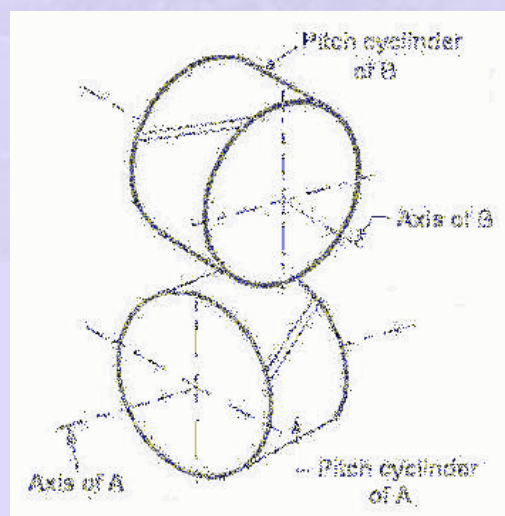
View of the pitch cylinder of a pair of crossed –helical gear
